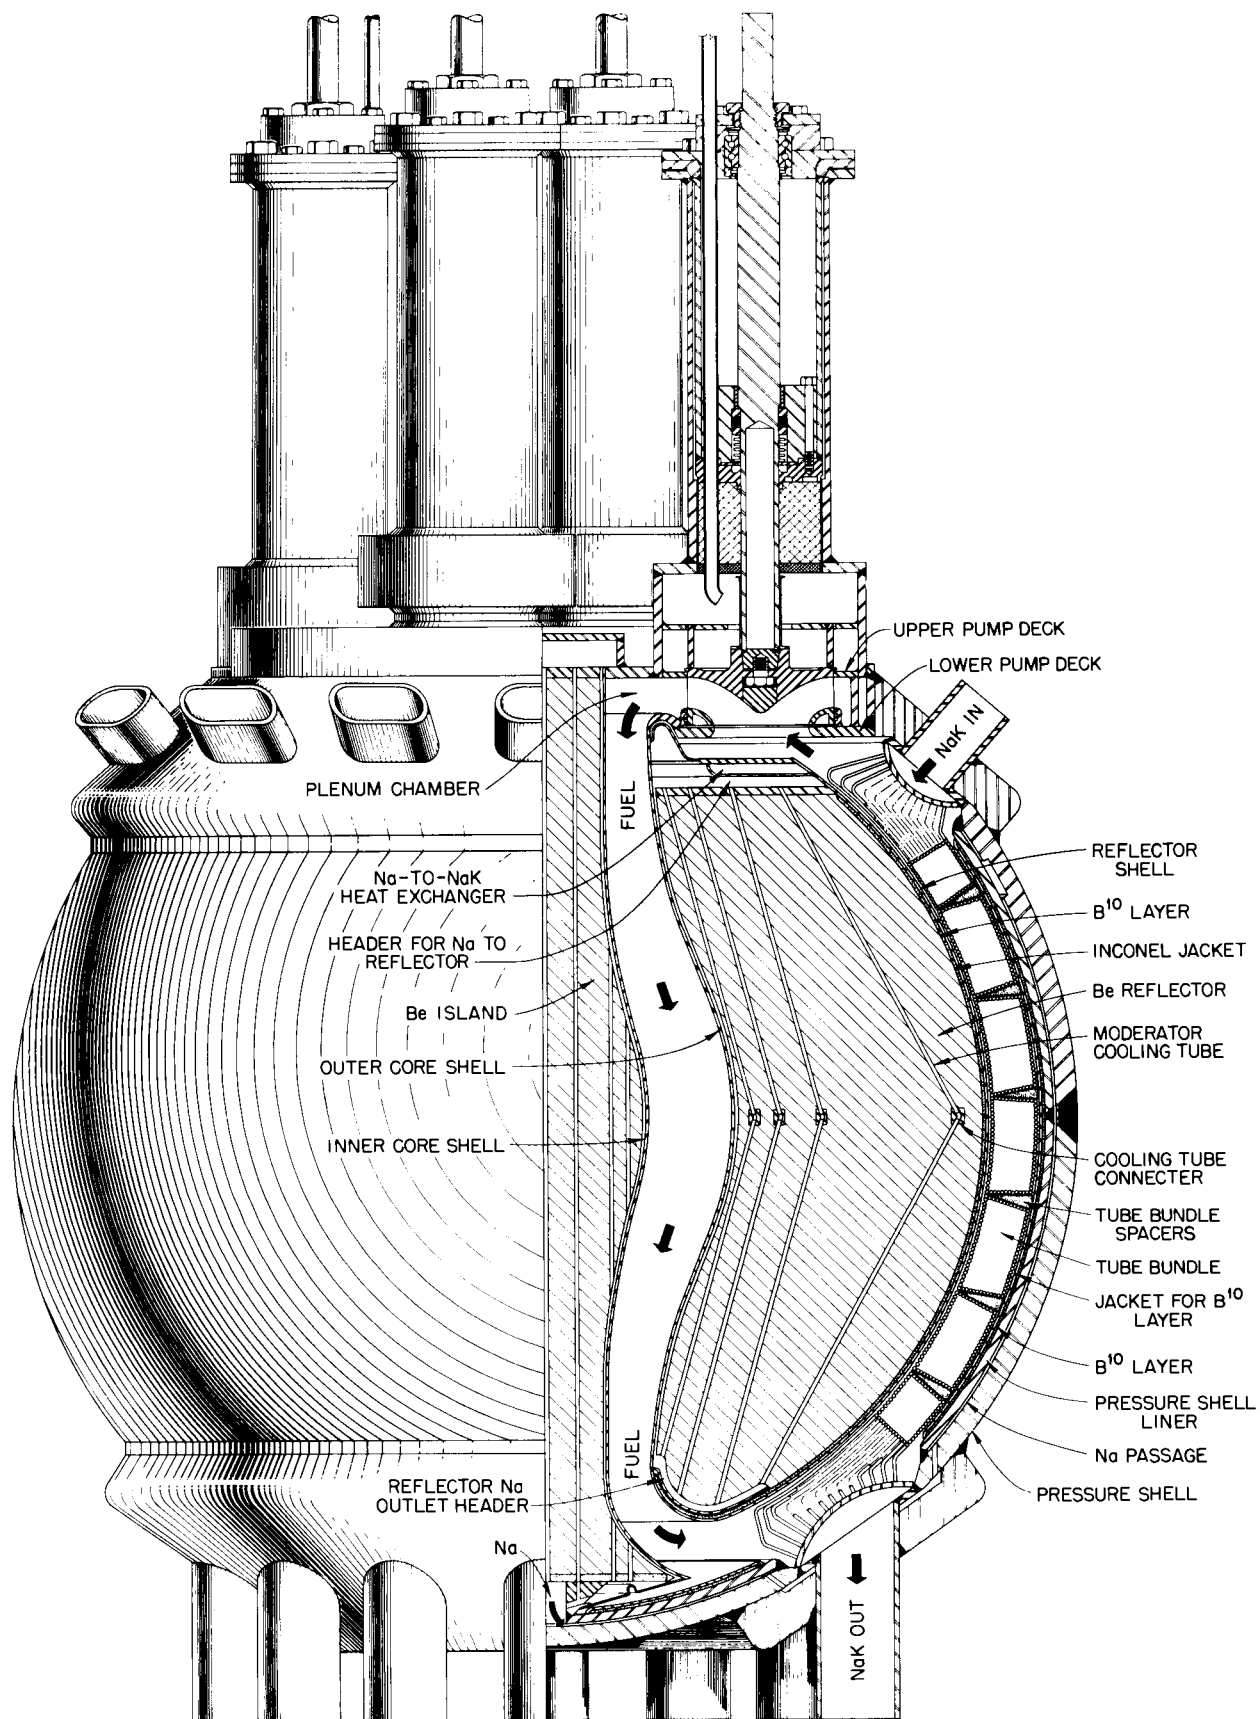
(Dwg. 22342) Cutaway View of Circulating Fuel Reactor.
